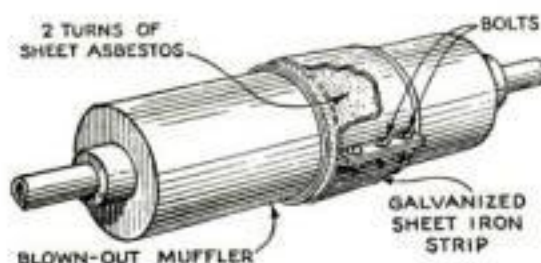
Sheets of asbestos and galvanized iron give a lasting patch for blown-out muffler
